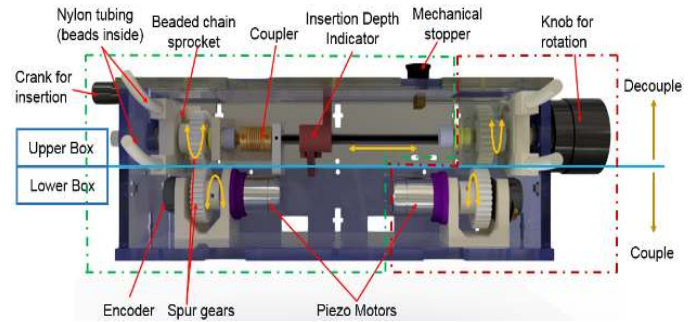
CAD model of the actuation box showing its components and internal motions. The presented setup is the motorized mode, the gears are engaged. Once the upper box is lifted up, the gears will be separated and will switch to manual mode.
